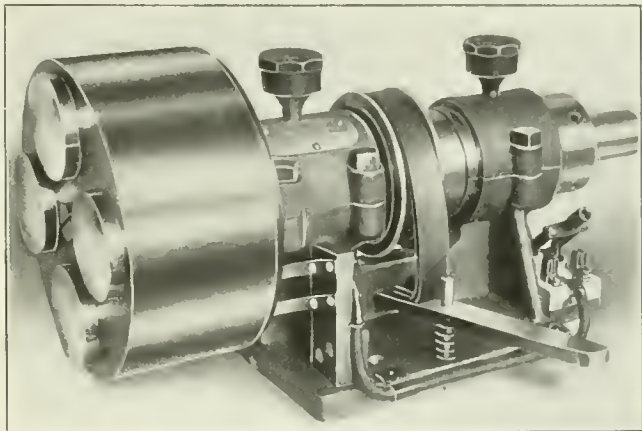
Rotary Magnetic Chuck used in Connection with the Rotary Grinding Process
